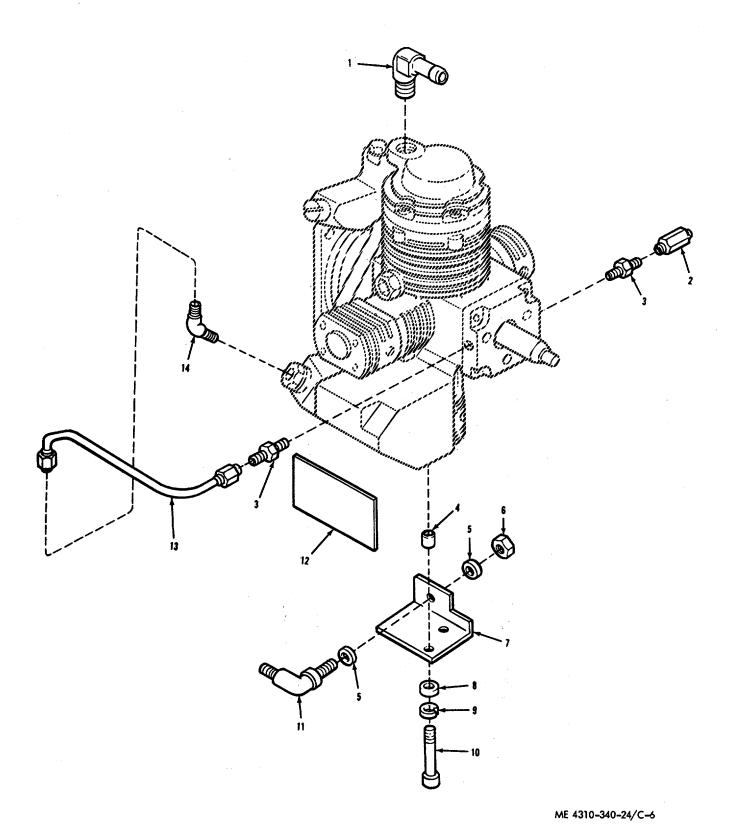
Inlet oil tube, elbows, discharge bracket, fittings, unions, and related parts – exploded view
